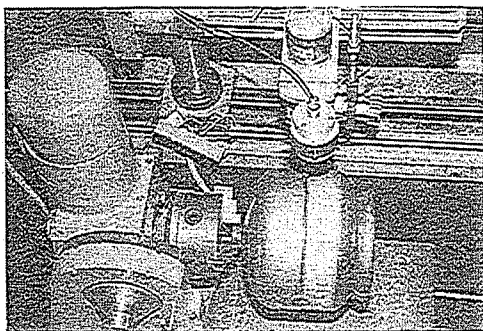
Welding set-up for tracking round butt weld seam of liquidated gas jars
